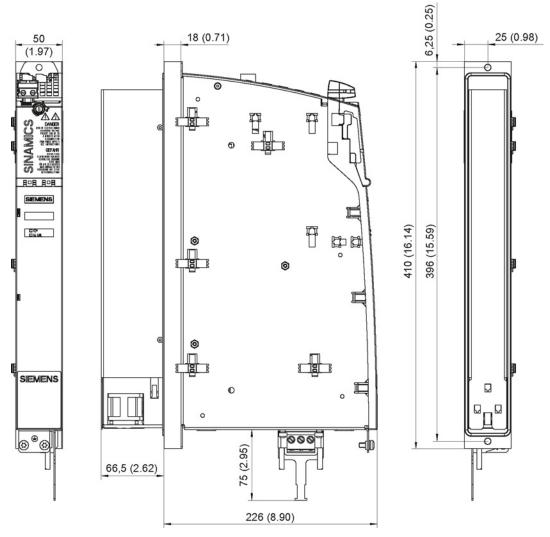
Dimension drawing of 5 kW and 10 kW Smart Line Modules with external air cooling, all dimensions in mm and (inches)
